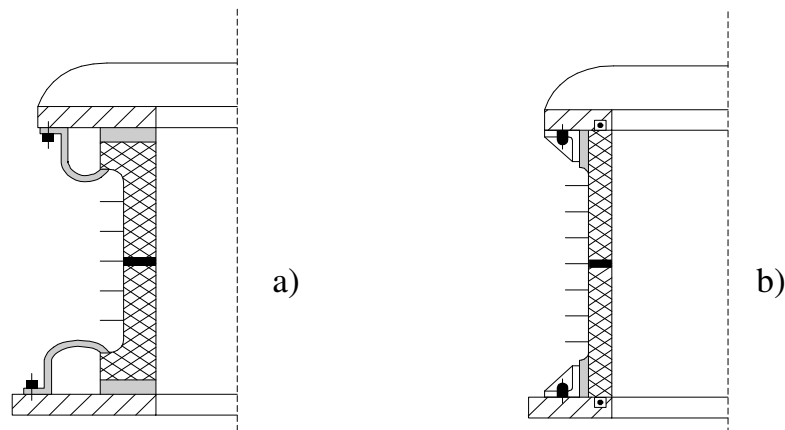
Design concepts of flange fixing to porcelain insulators, a) by clamping and b) by cementing
